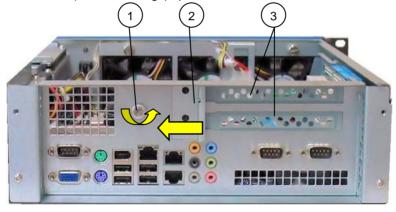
Detail: Rear side with slide bracket closed (for fixing the expansion cards)
